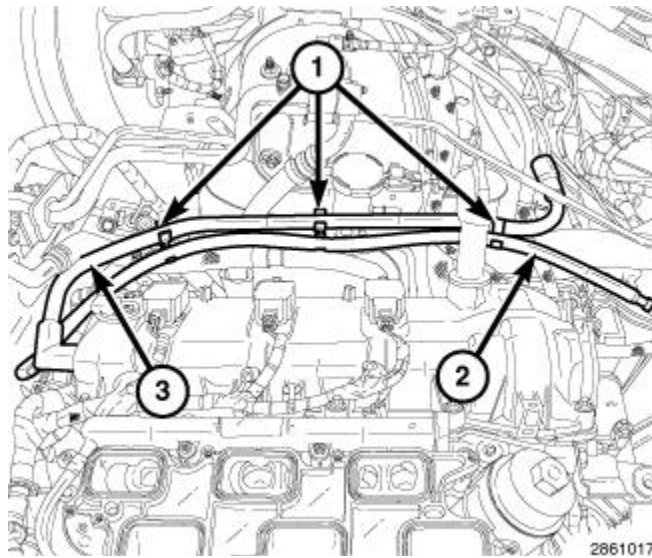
Transmission Breather Hose, Make-Up Air Tube & Clips
